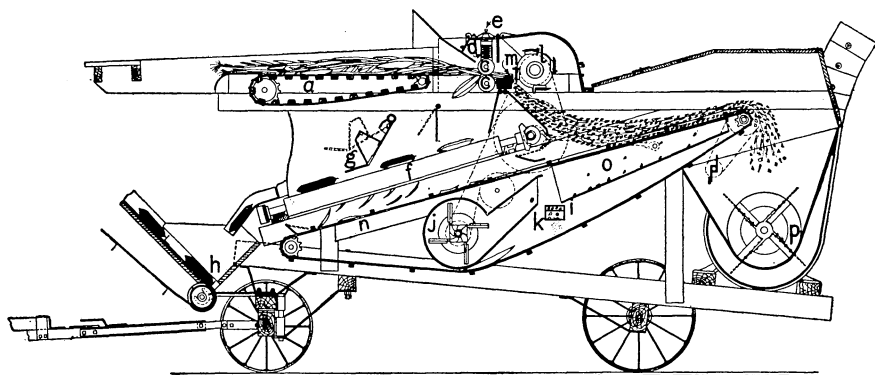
Husker-shredder equipped with conveyor-type feeder (a); c, horizontal snapping rolls; d, snapping-roll springs and adjusting nuts (e); f, husking rolls; g, ear-corn kicker and carrier (h); o, cleaning shoe and fan (j); i, k, cross shake and screen; l, cutter head; m, shear bar; n, slatted conveyor; p, blower
